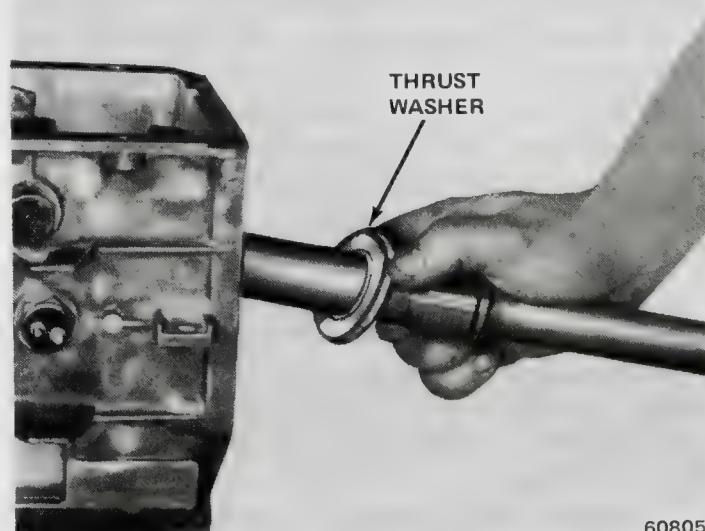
B-31 First Gear Thrust Washer Removal/Installation
